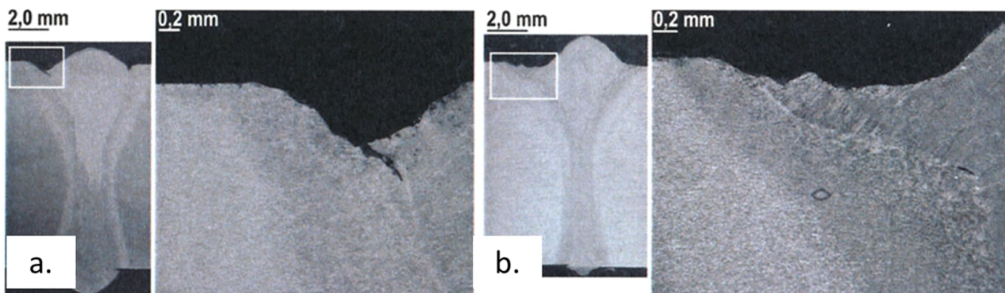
Weld cross-sections from a laser-hybrid weld and different types of undercut: a) steel with mill scale, b) mill scale removed (Frostevang, 2019).
